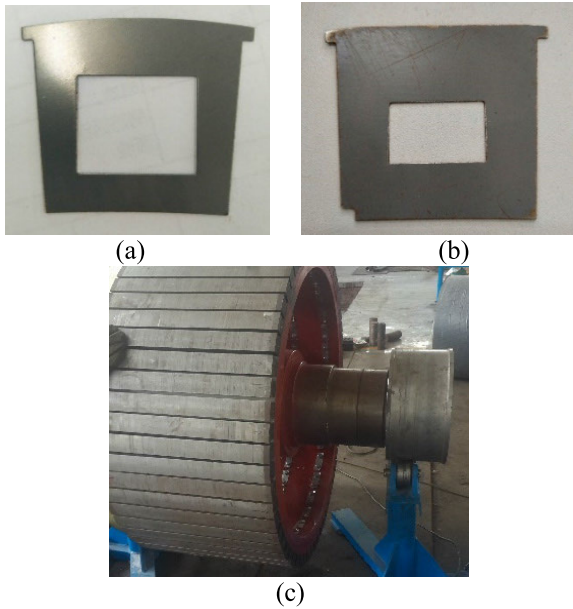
Rotor sheet shape. (a) Sine rotor (b) Sine + 3rd rotor (c) Rotor complete.
